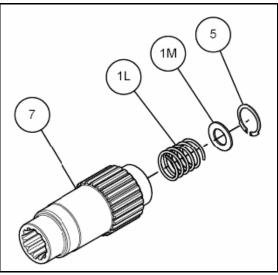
Spindle-Brake Subassembly - Figure 2
